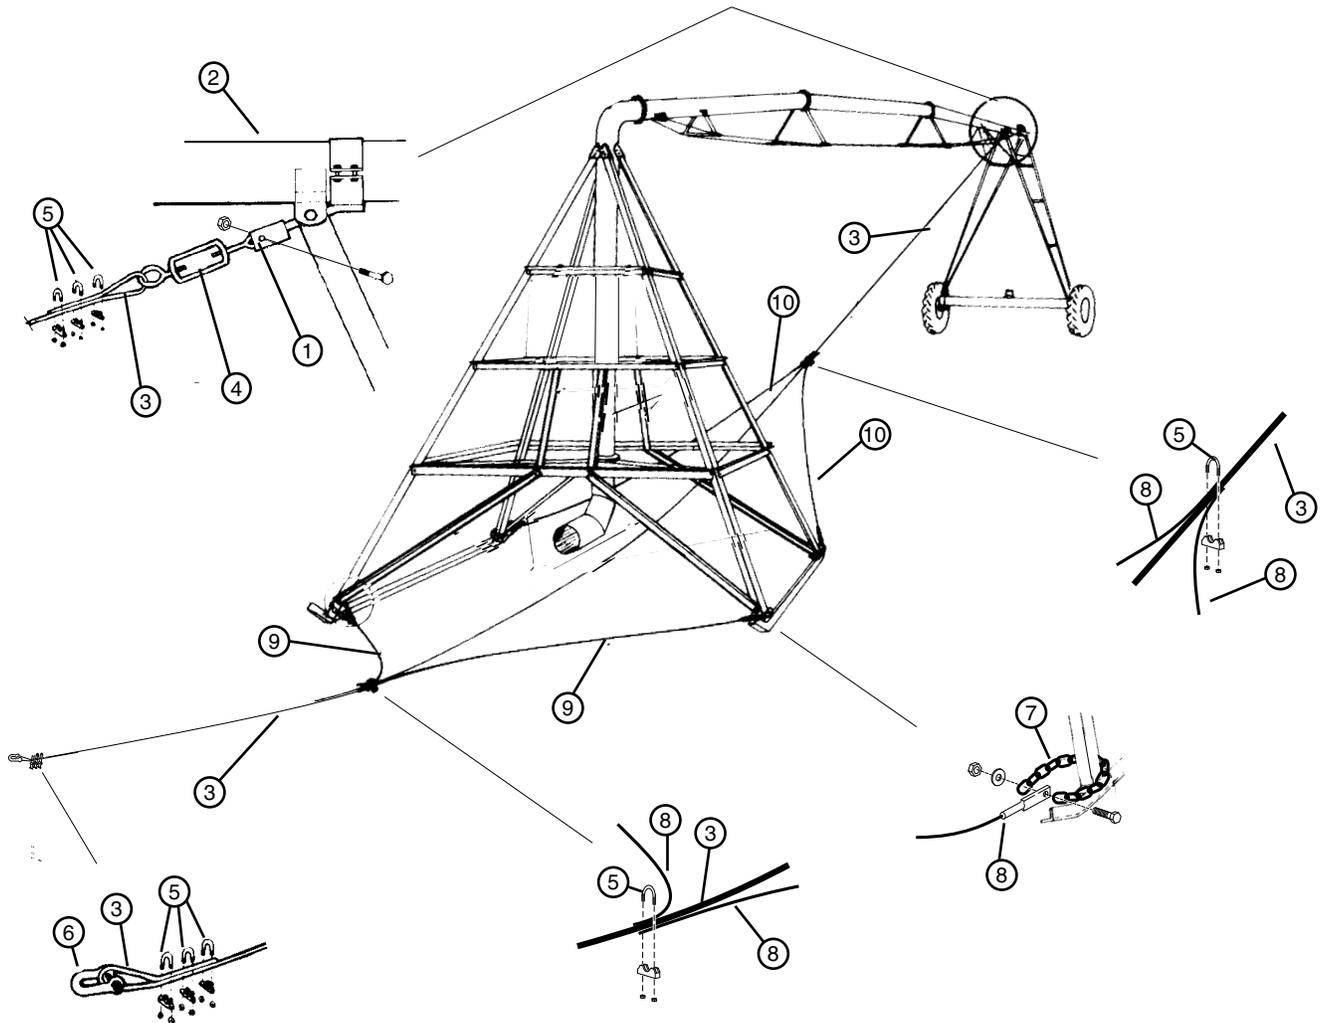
1. Tow Cable Attachment Bracket 5. 1/2 in Cable Clamp 9. Leading Trail Cable
